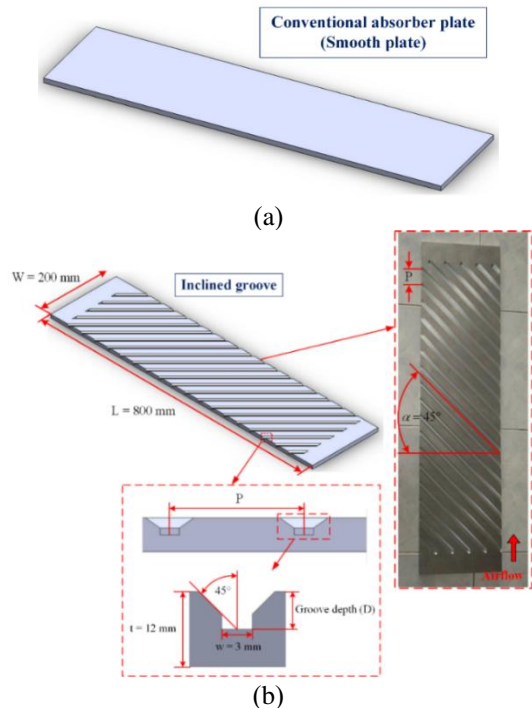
Test section with (a) smooth plate and (b) inclined-grooved plate.
